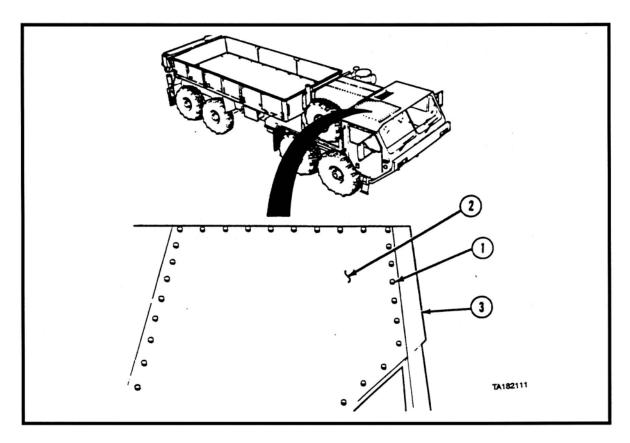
Remove the Passenger-Side Roof Panel (Machine-Gun Mount) Attachment Bolts.
